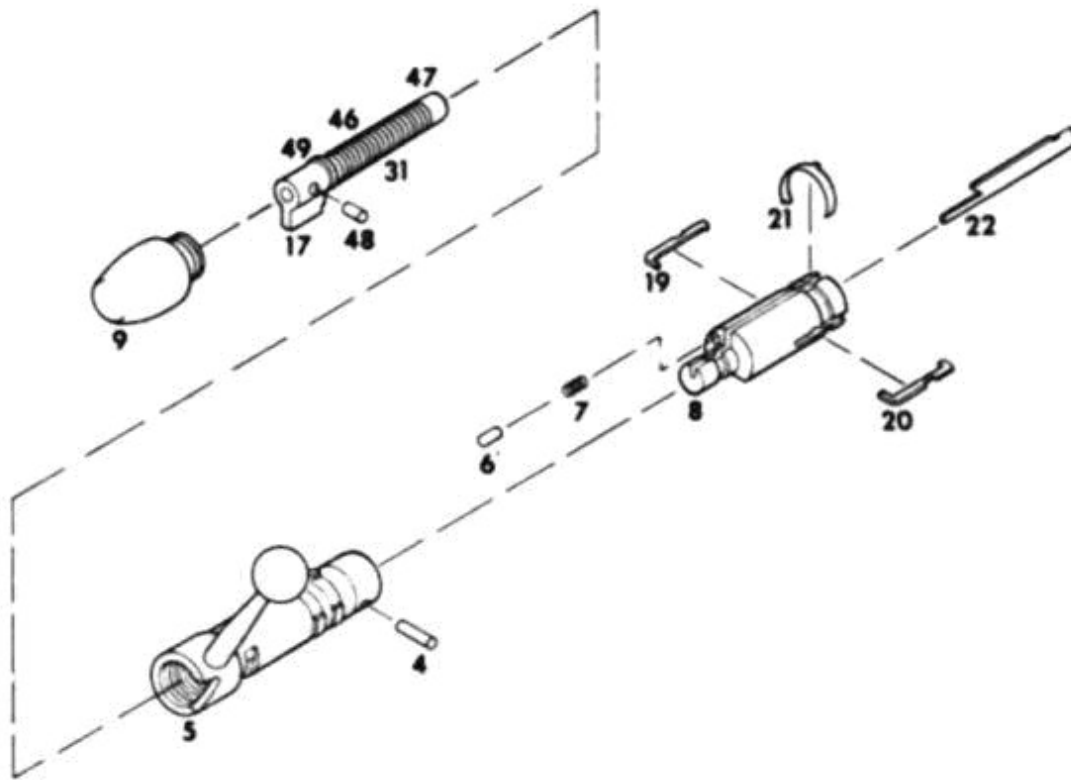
Exploded drawing of a bolt for a Remington Model 540-XR bolt-action rifle.
